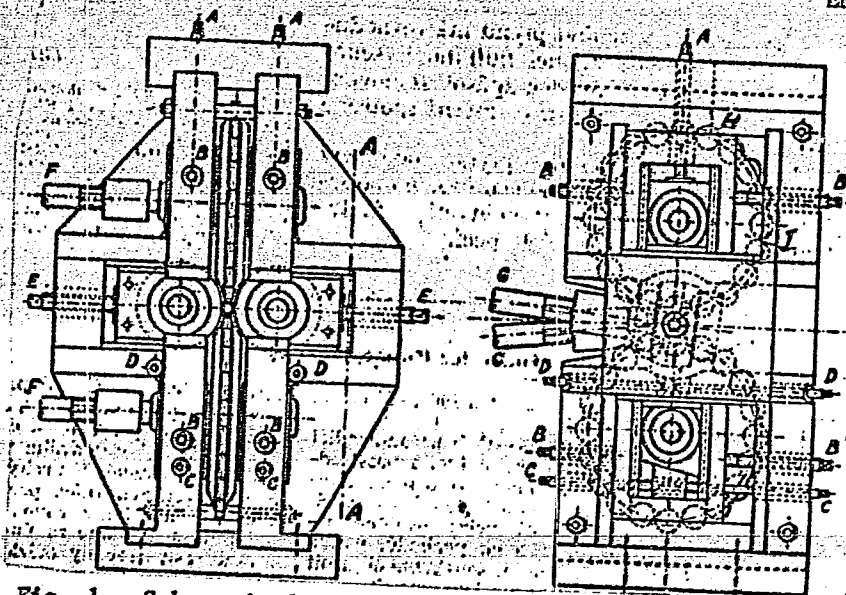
Schematic layout of the prototype of combination mill for slideless rolling of seamless tubes
